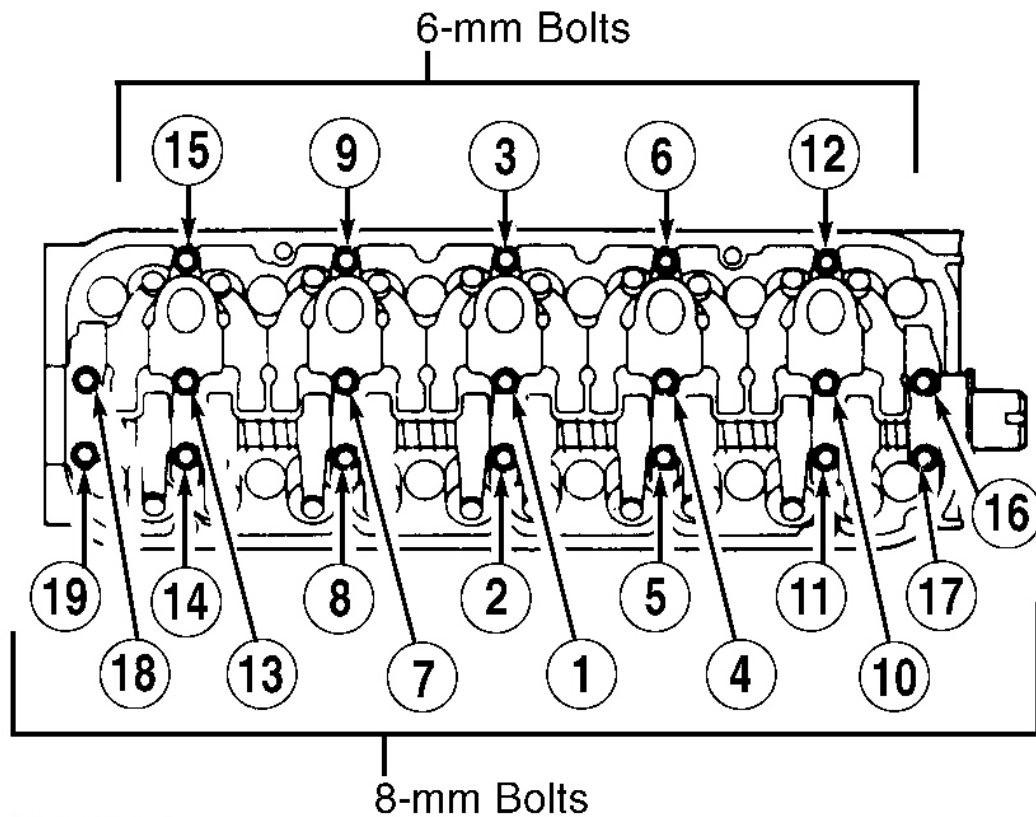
Camshaft Bearing Cap Bolt Tightening Sequence
